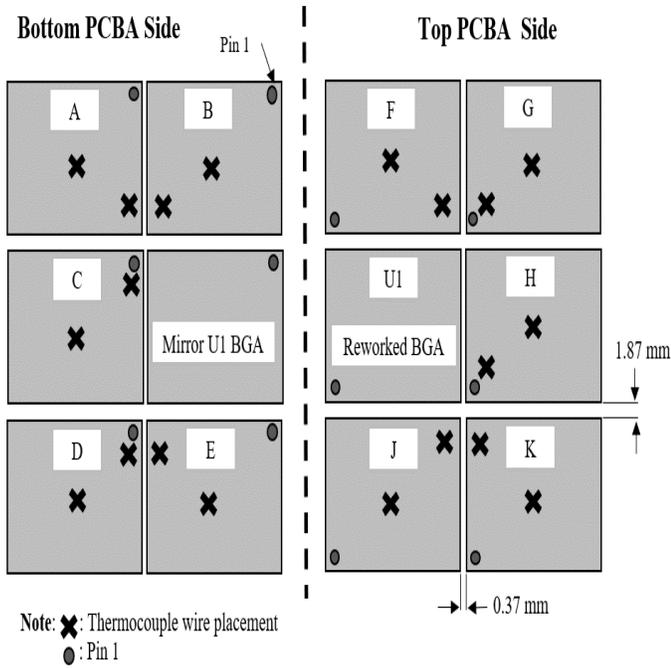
Schematic of the BGA components layout and reworked component location (U1)
